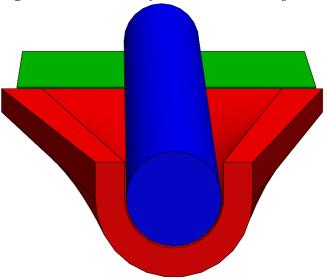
illustrates the front view of the proposed continuous forming process. The die (represented in red) replaces the multiple forming rollers required for deformation. The geometry of the die superimposes the multiple increment forming stands into a continuous forming geometry. As the metal strip (represented in green) moves forward, the material is formed into the geometry governed by the top surface of the die and the bottom surface of the mandrel. Large amounts of forming will occur at the exit of the forming die, the mandrel (represented in blue) aids with keeping the material in constant contact with the die and helps control the geometry of the metal strip at exit prior to welding. The dimensions of the die and mandrel will have to accommodate spring-back and aid with overbending the metal strip prior to exit from the die.
